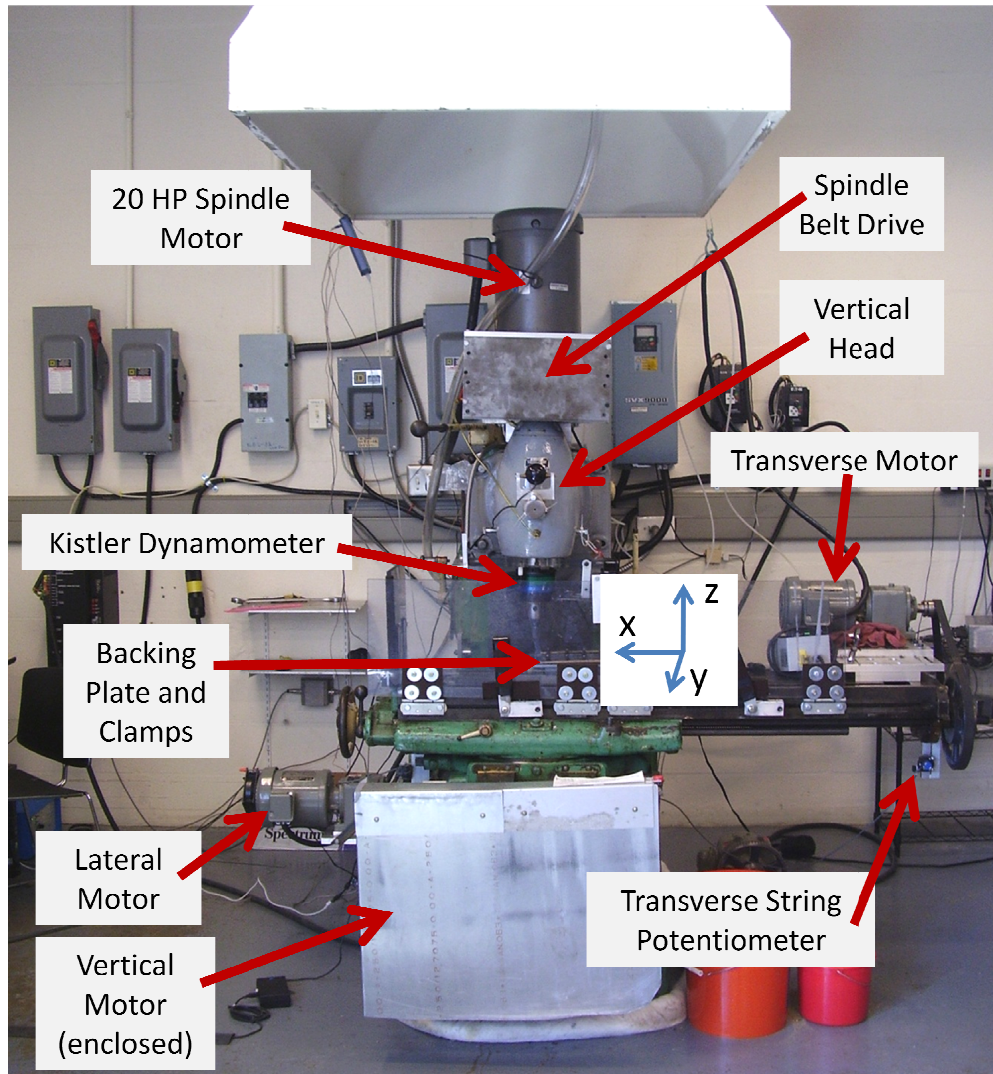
Vanderbilt University Welding Automation Laboratory's FSW Machine
